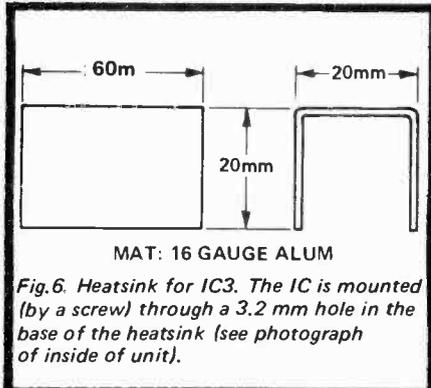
Heatsink for IC3. The IC is mounted (by a screw) through a 3.2 mm hole in the base of the heatsink (see photograph of inside of unit).
